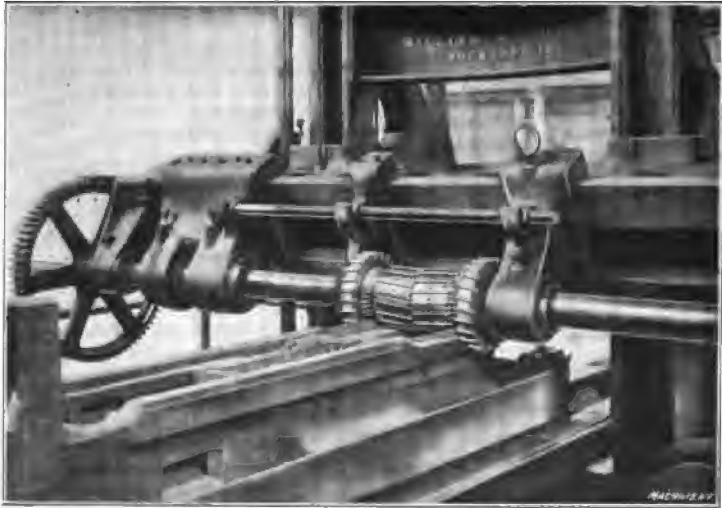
Milling the Ways of a Turret Lathe Bed on a Horizontal Machine
